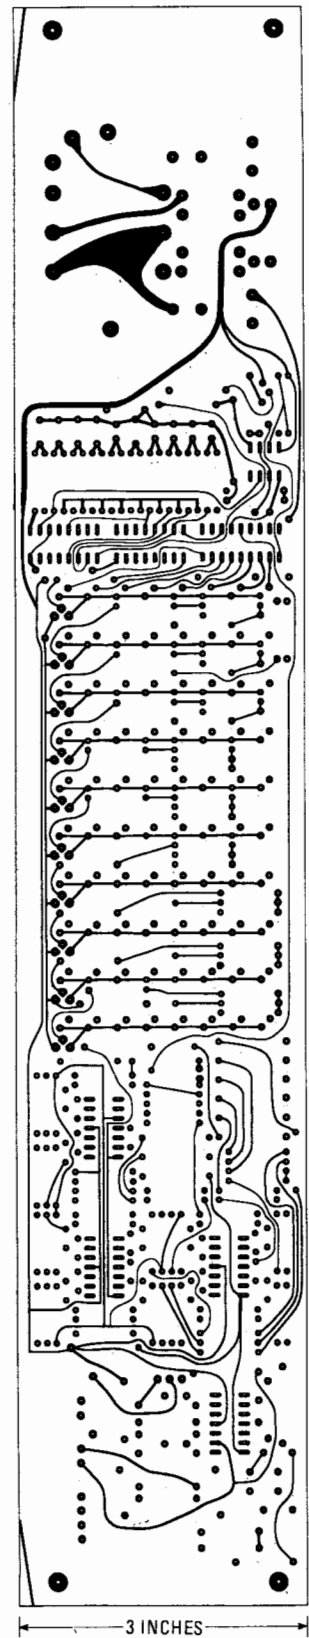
THE SOLDER SIDE of the analyzer circuit board is shown here half-sized.
